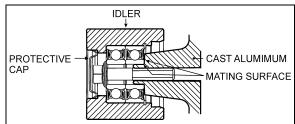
IDLER MOUNTED ON THE CAST ALUMINUM SUPPORT
